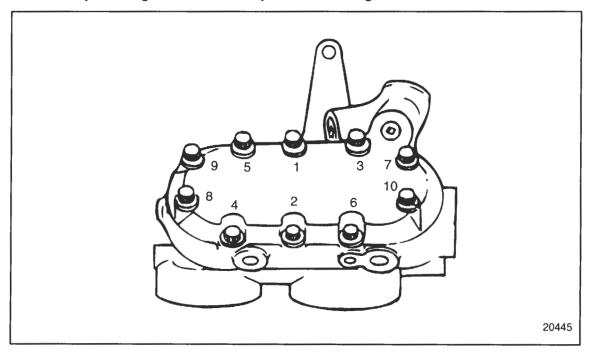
Oil Cooler Housing Bolt Torque Sequence
